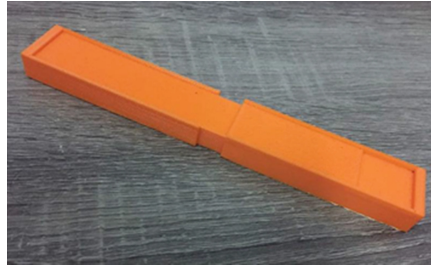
The jig fabricated by a 3D printer to bond single lap joints with thickness of 0.1 mm.
